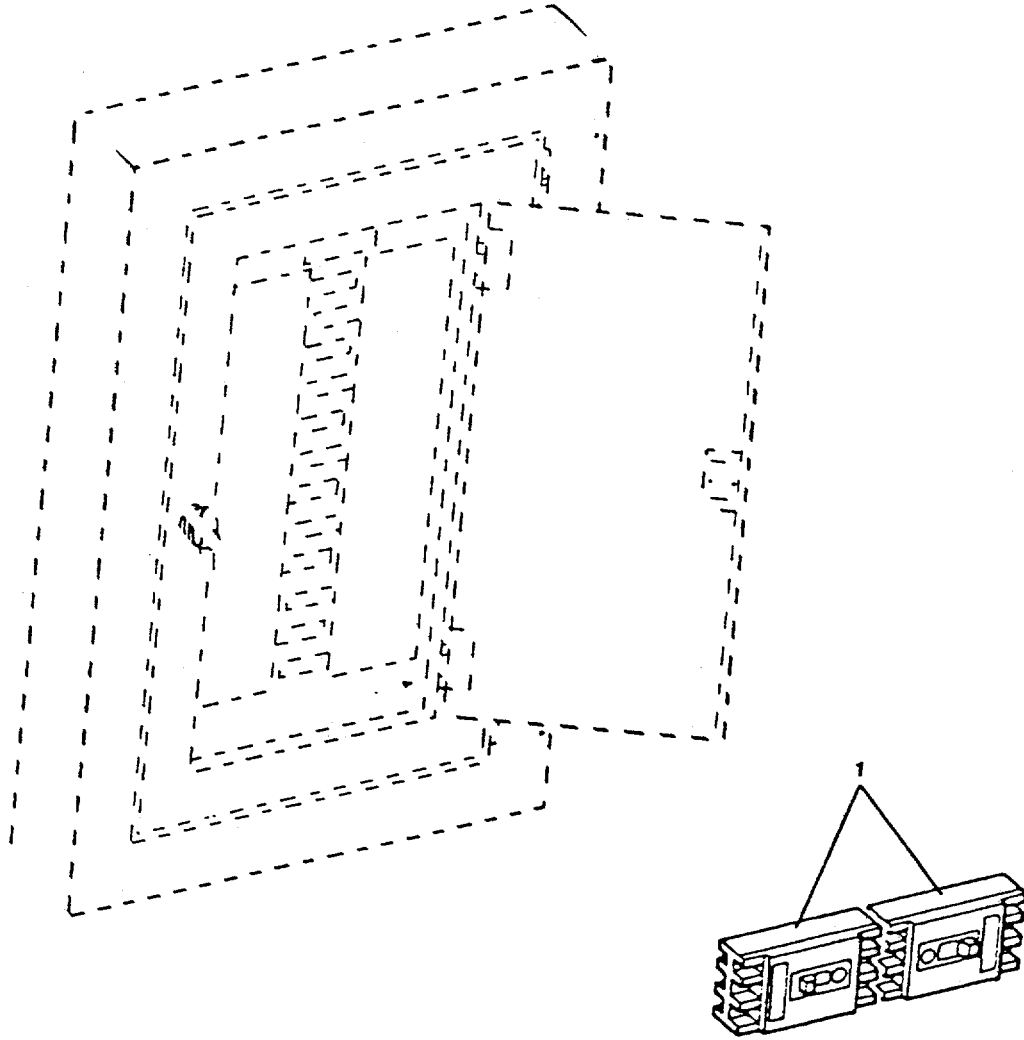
F AUXILIARY PANEL BOARDS (P6A)
